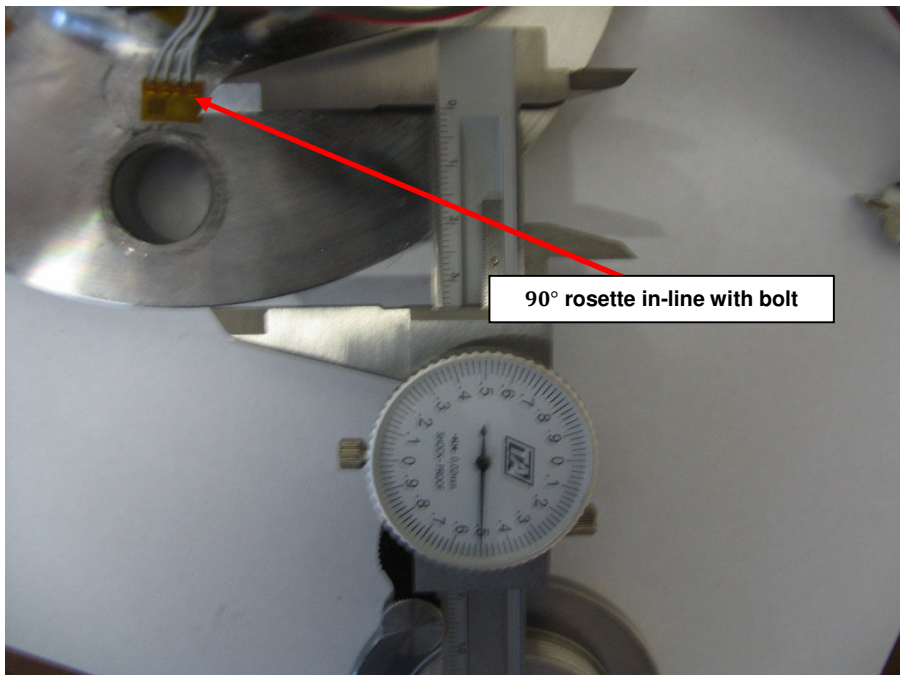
Photograph of the position of the 90° rosette which is in-line with the bolt on the ring of the raised face flange with an O-ring groove
